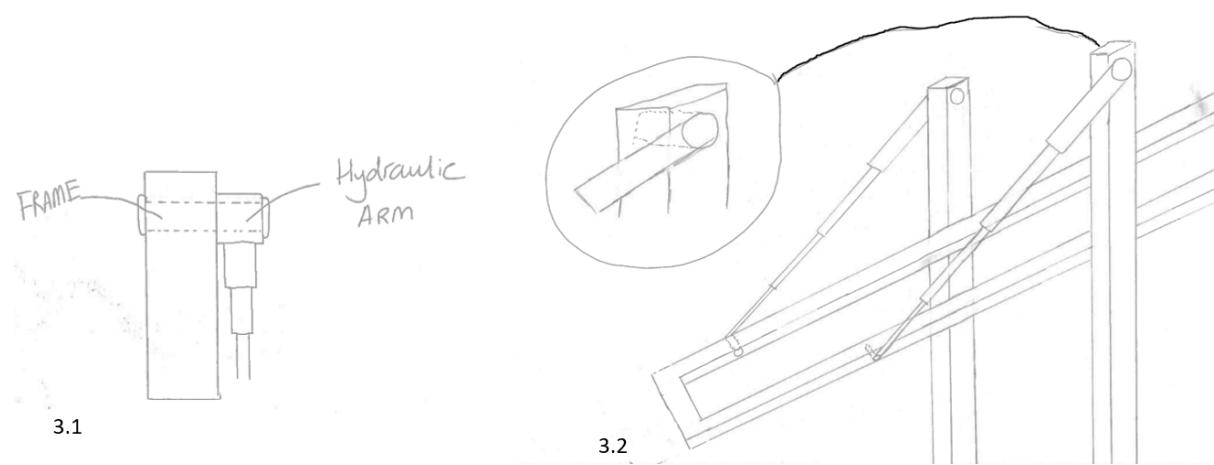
Front view boom support (3.1) and 3d view boom support (3.2)
